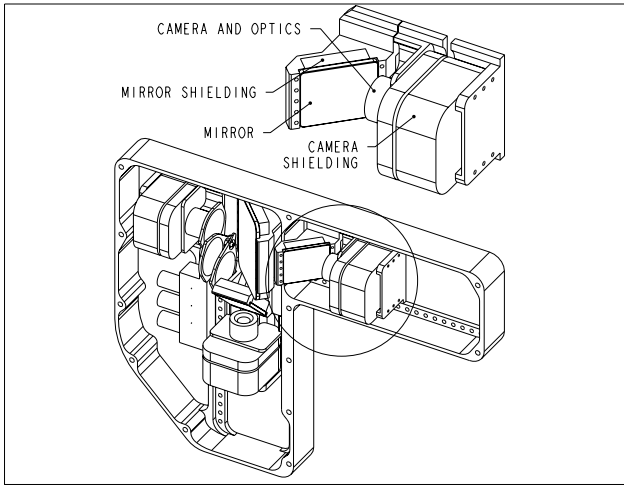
Mapper Camera System Assembly: Detail shows typical camera assembly.
